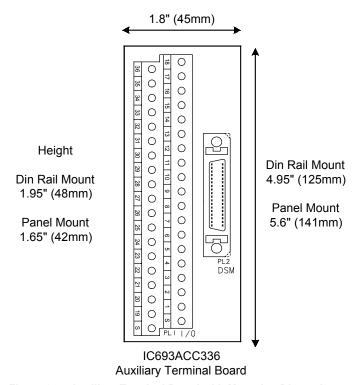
Auxiliary Terminal Board with Mounting Dimensions
